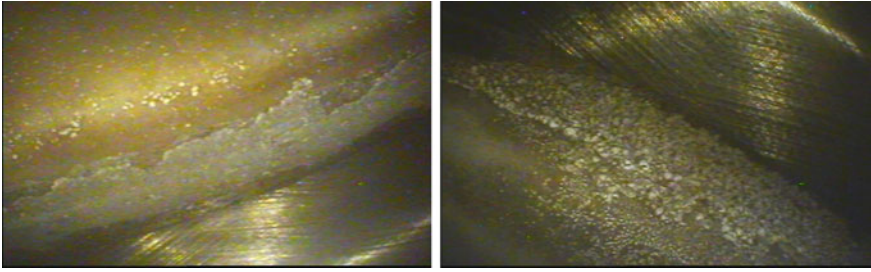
HNG engine piston after 45,000 km and CNG engine piston after 150,000 km
